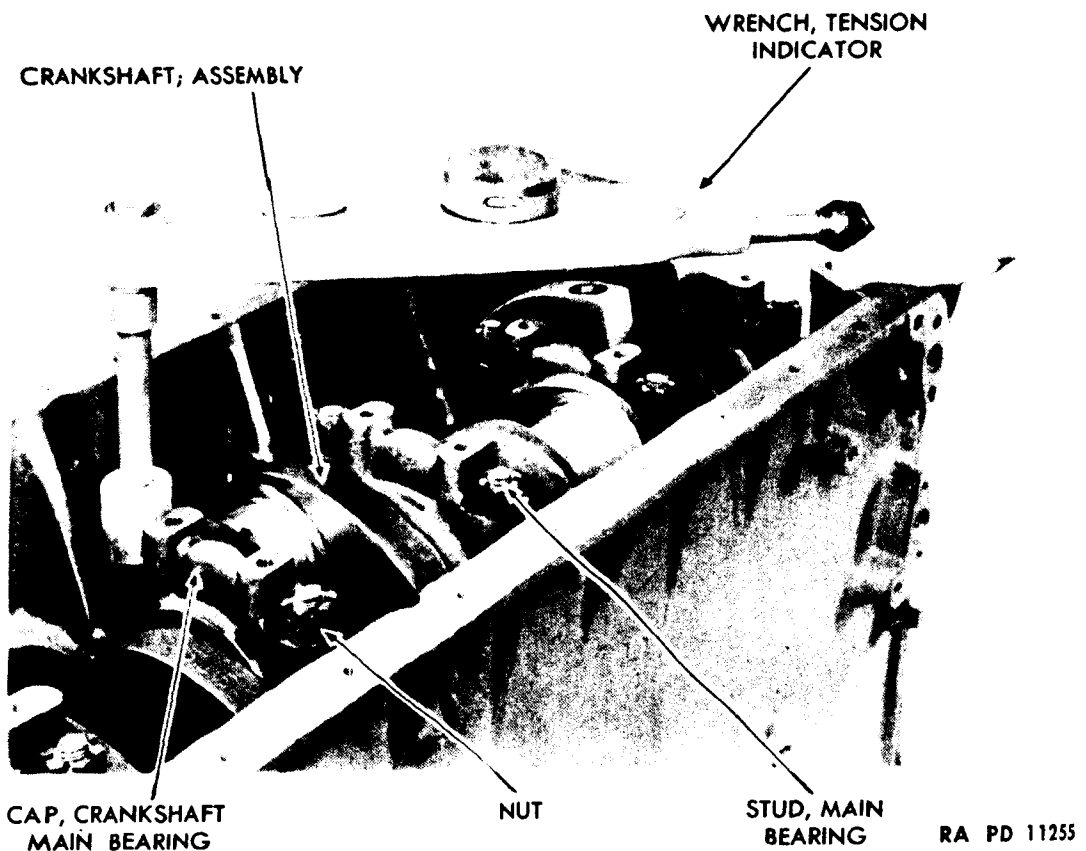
Using Tension Indicator Wrench to Tighten Nut on Crankshaft Main Bearing Cap
